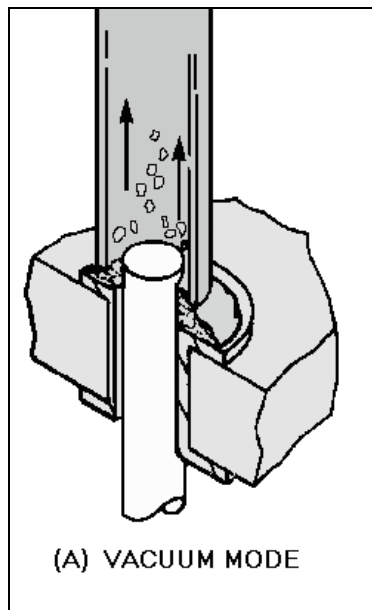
A.—Motorized vacuum/pressure solder removal. VACUUM MODE.
